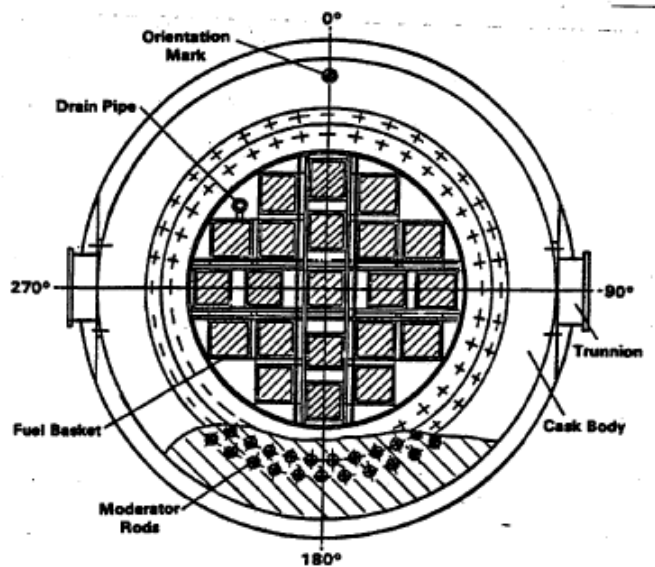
Sectional view of the basket assembly of the CASTOR V/21 cask (EPRI, 2002)
